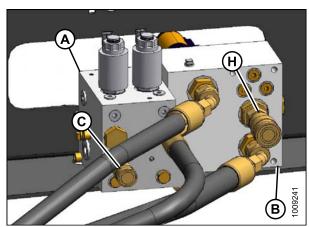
Valve Blocks without Reverser Valve Configured for Auger Header
